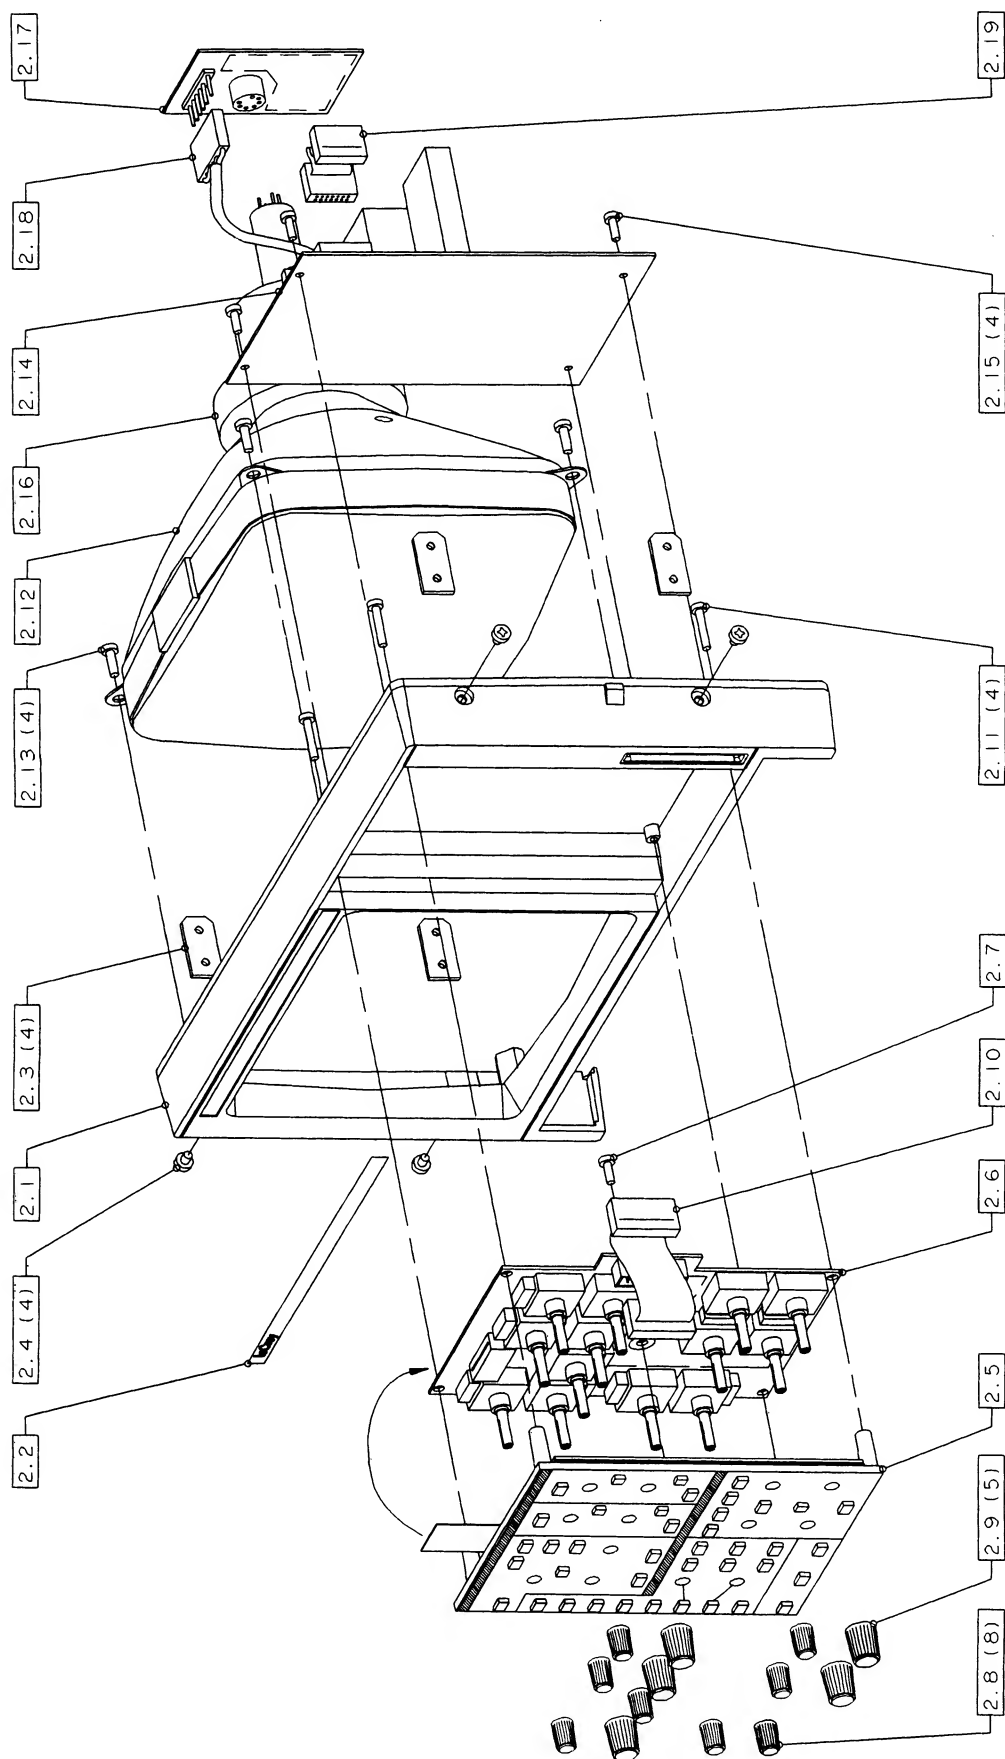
9320 FRONT FRAME EXPLODED VIEW
